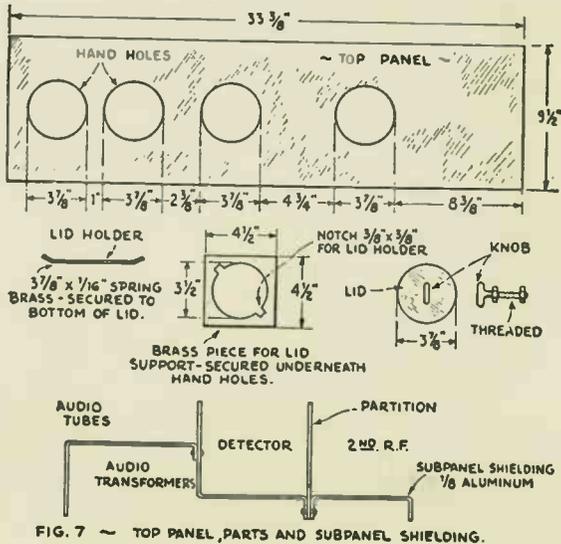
~ TOP PANEL, PARTS AND SUBPANEL SHIELDING.
